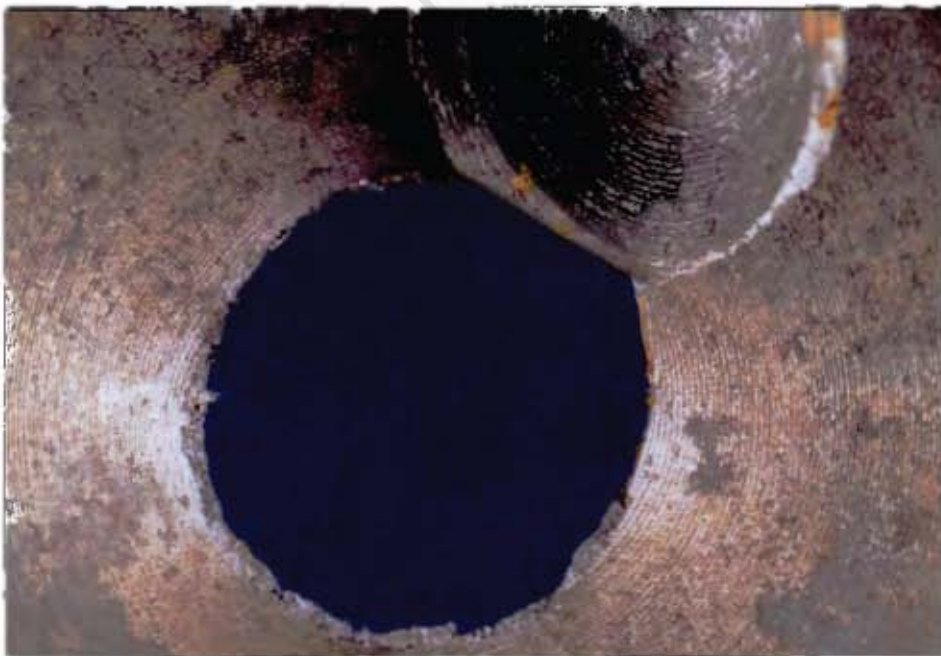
A Plate with an Angle of Fracture Mainly of 45° .
